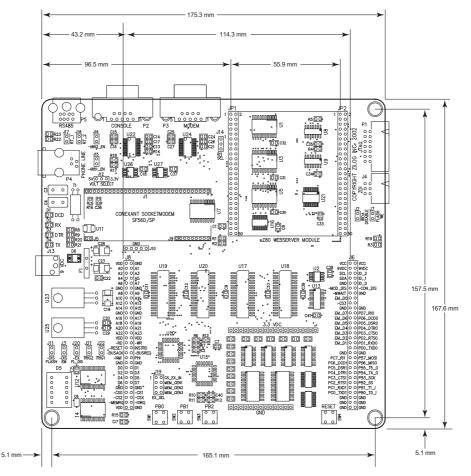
Physical Dimensions of the eZ80[®] Development Platform
